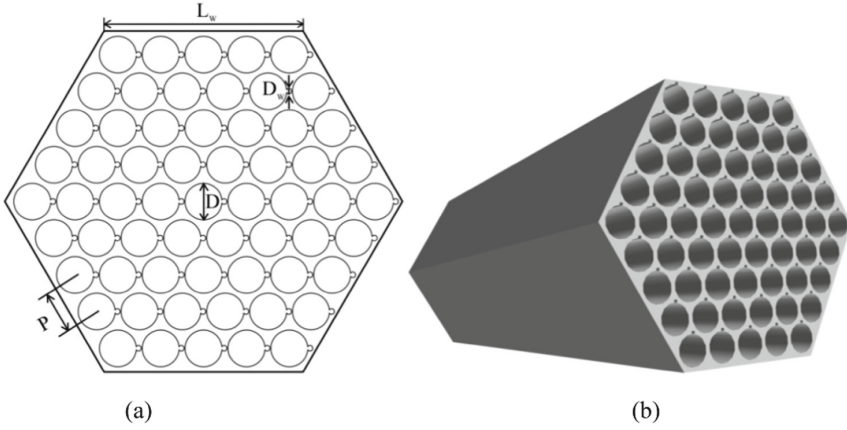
61 wire-wrapped rod bundle assembly (a) top view (b) 3D view
